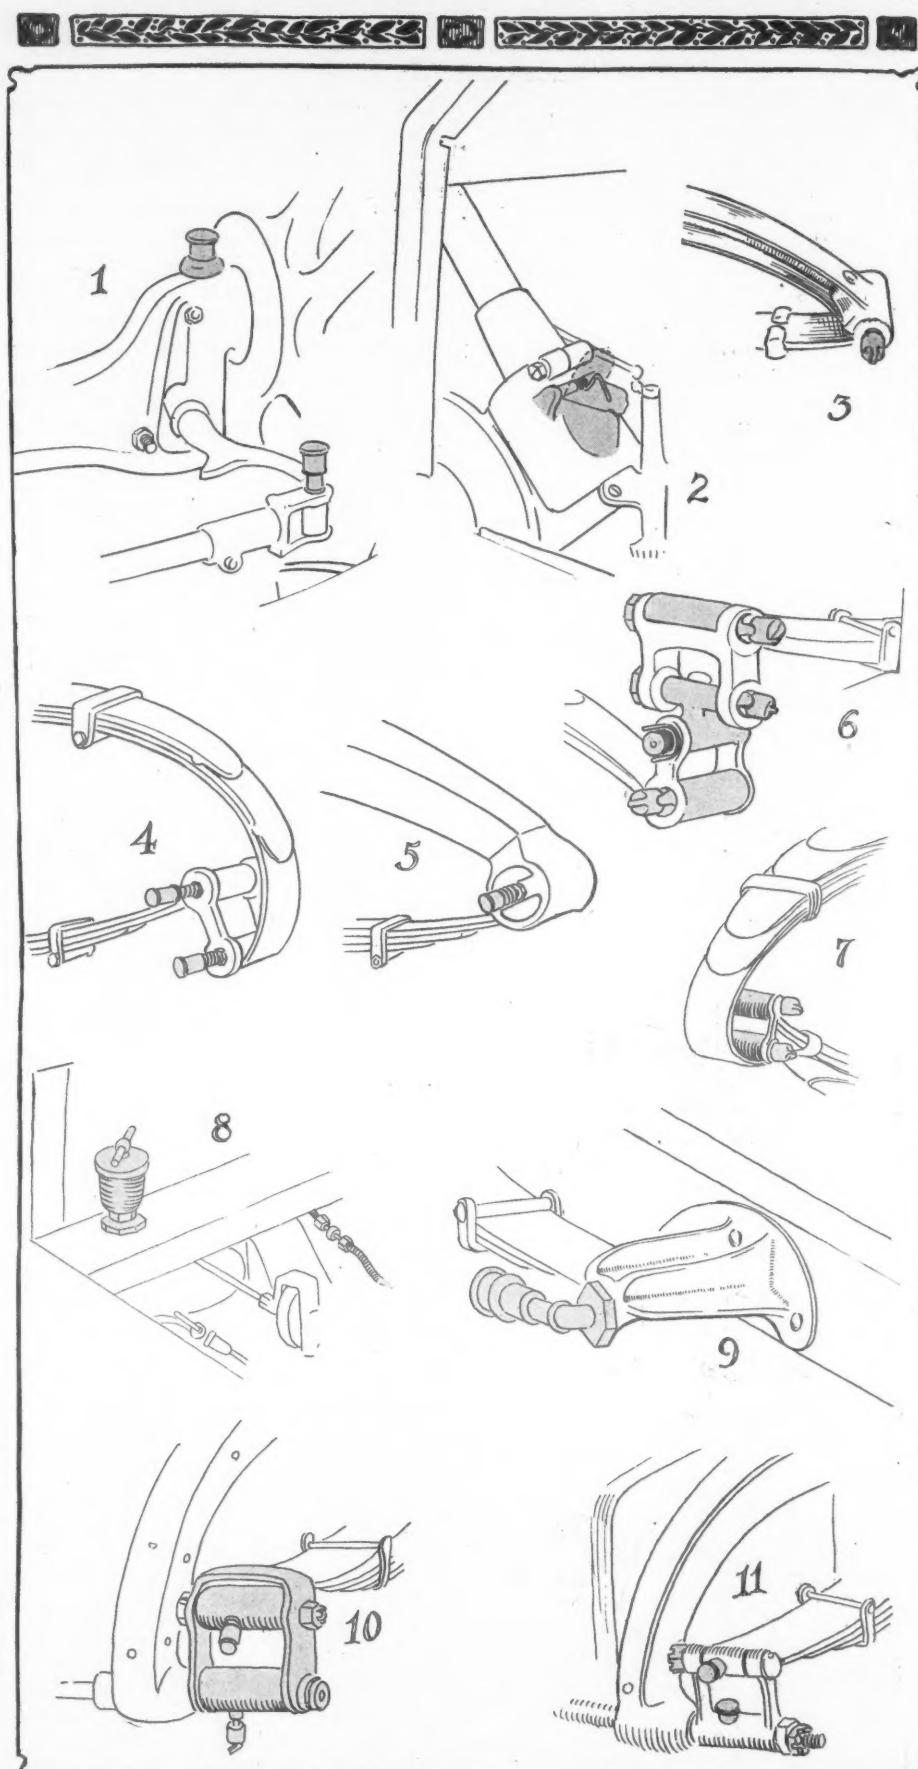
1, CADILLAC STEERING KNUCKLE; 2, PREMIER STEERING-GEAR OIL-CUP; 3, INSIDE SPRING-BOLT GREASE CUP; 4, 5, HAYNES SPRING SHACKLE GREASE CUPS; 6, LOZIER UNIVERSAL SPRING SHACKLE; 7, SPRING SHACKLE GREASE CUPS; 8, CHALMERS' CLUTCH-OILING CUP; 9, CADILLAC REAR SPRING-BOLT OILER; 10, LOCOMOBILE SPRING SHACKLE; 11, OIL-CUPS ON SPRING SHACKLE
